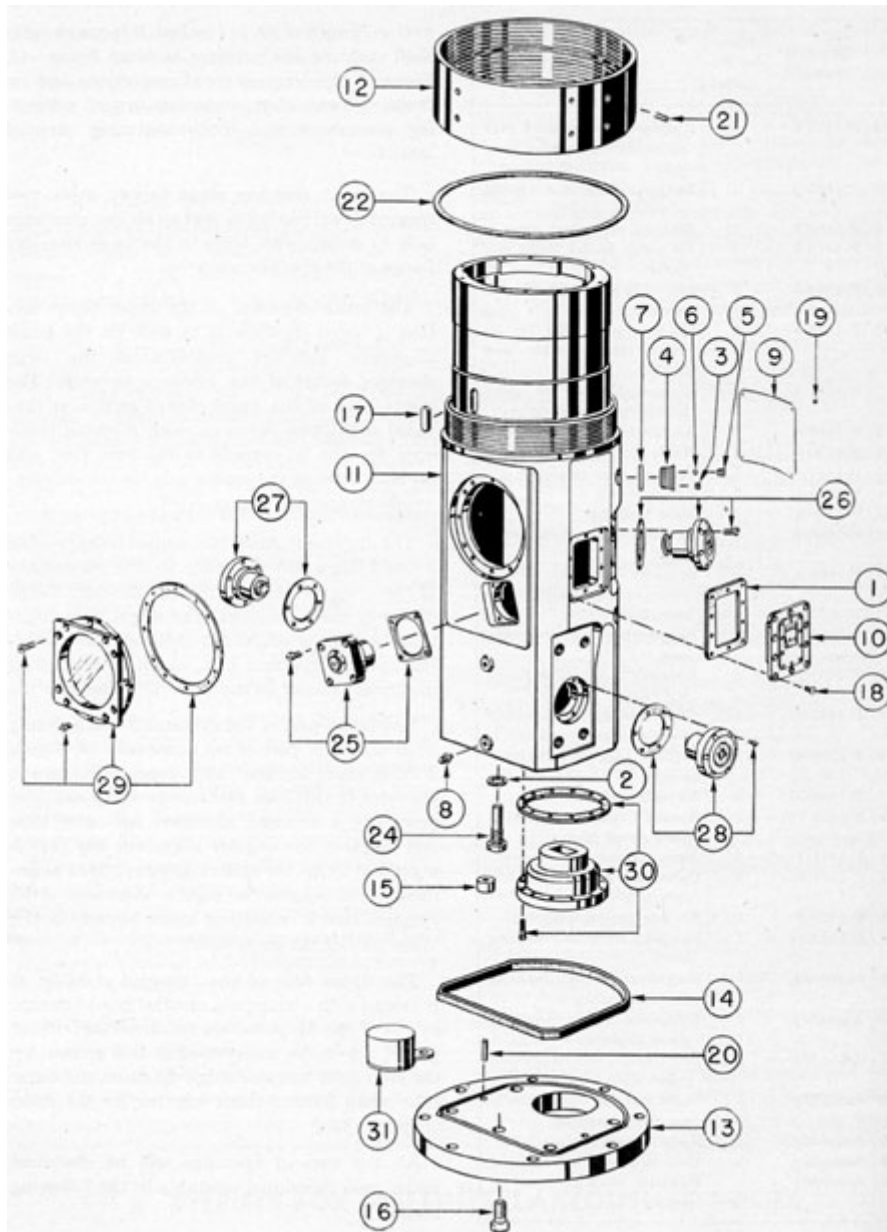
Eyepiece box and miscellaneous assemblies.
